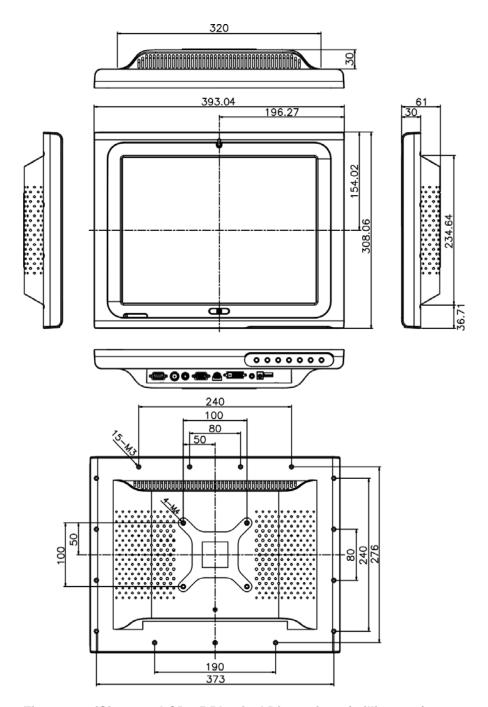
iSignager LCD-15 Physical Dimensions (millimeters)
